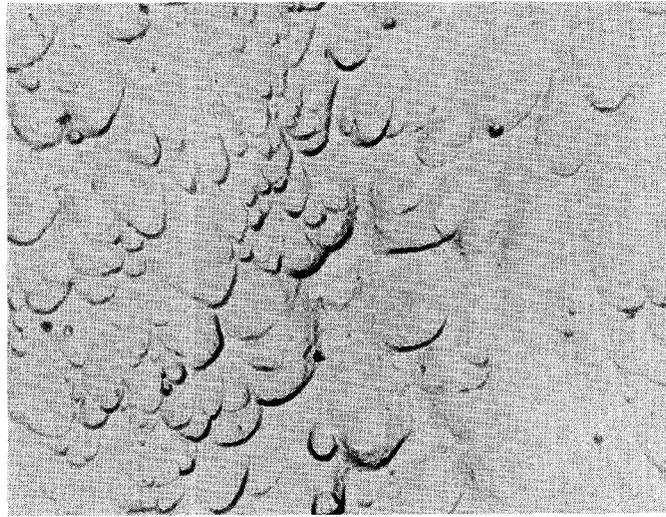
WOLF'S EAR FRACTURE SURFACE
